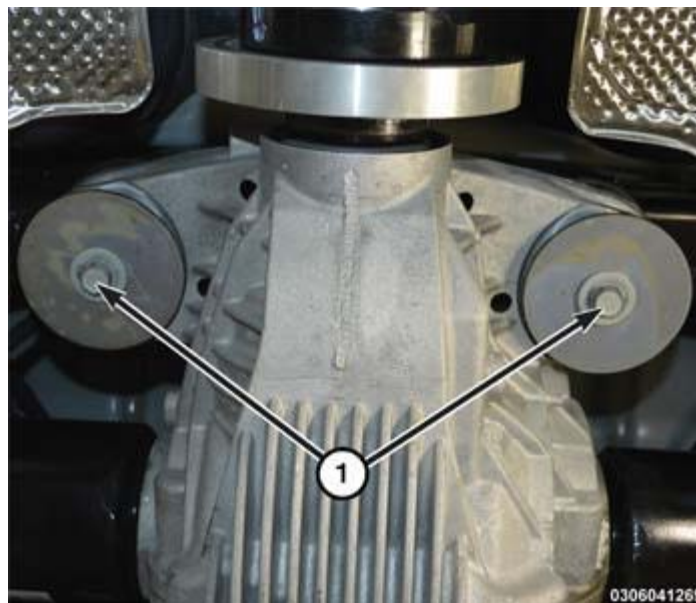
Rear Axle Forward Mount Isolator Bolts
